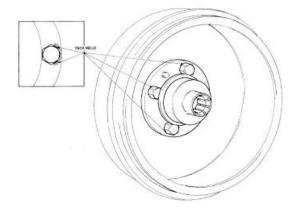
Welding Points For Propeller Shaft Bolts
